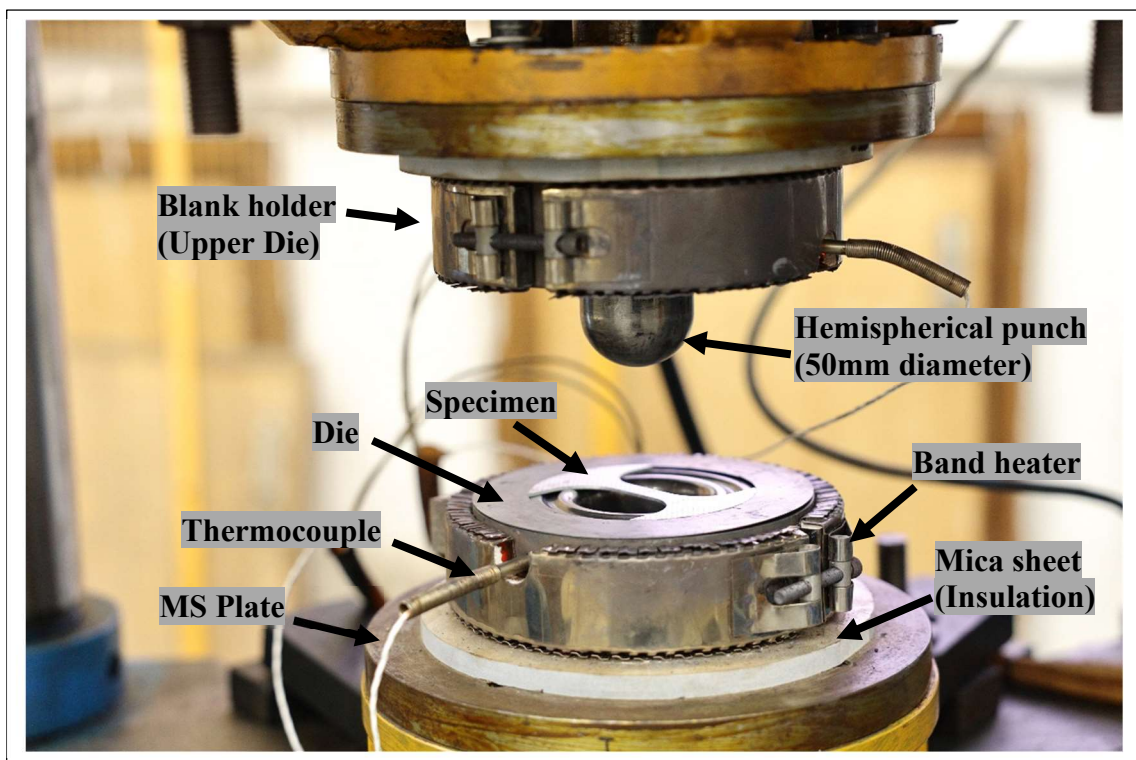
Die, blank holder, punch with heater and thermocouple assembly
